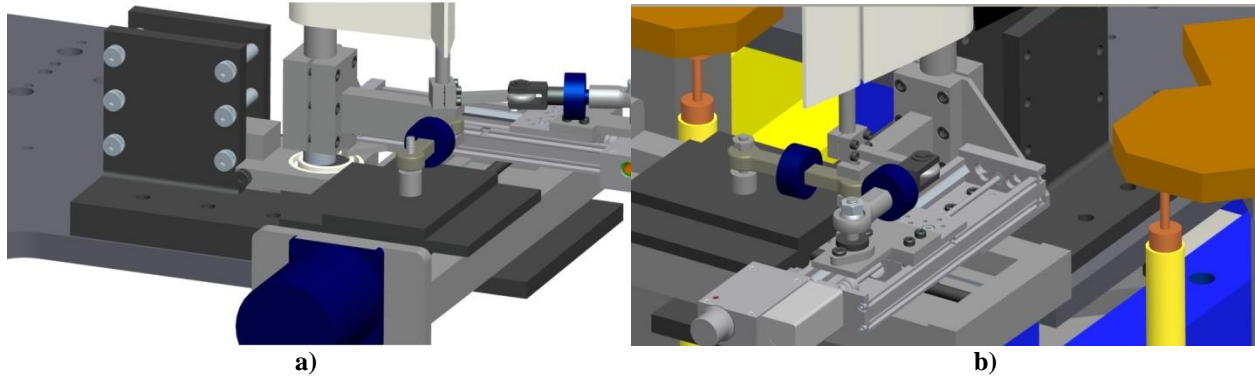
Drawings of a) flap and b) tab linkage systems installed below wind tunnel test section.
